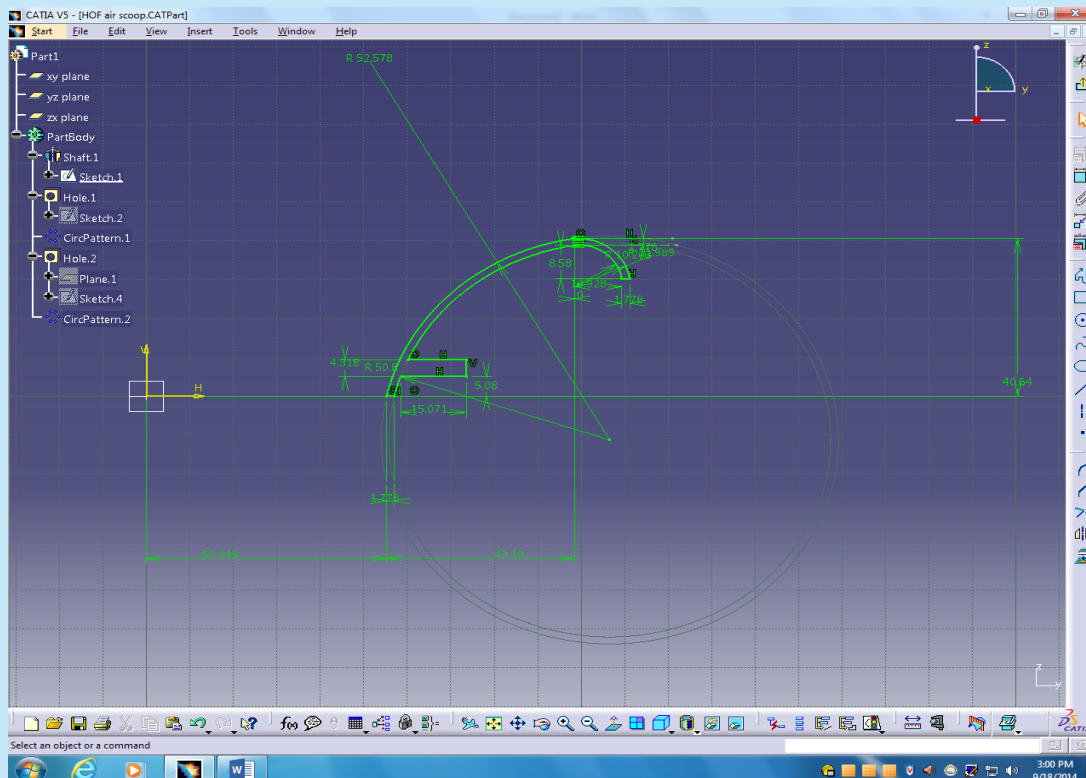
Sketch of the inlet cross-section with dimensions (in mm).
